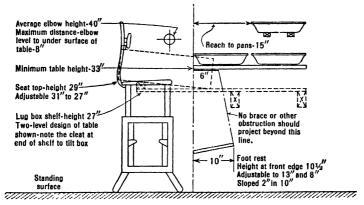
Cutting table dimensions. Table designed by the Industrial Welfare Commission of California.
